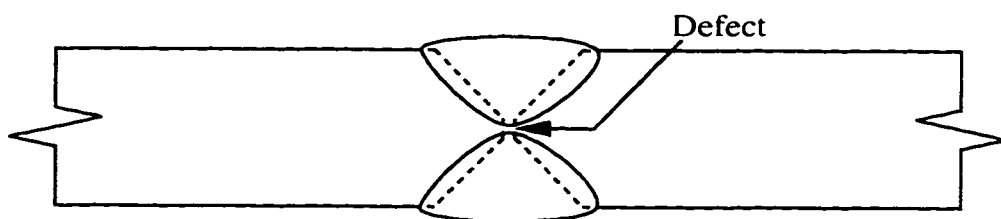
Butt weld lack of penetration defect. In this defect, the base metal is not melted through the thickness.
